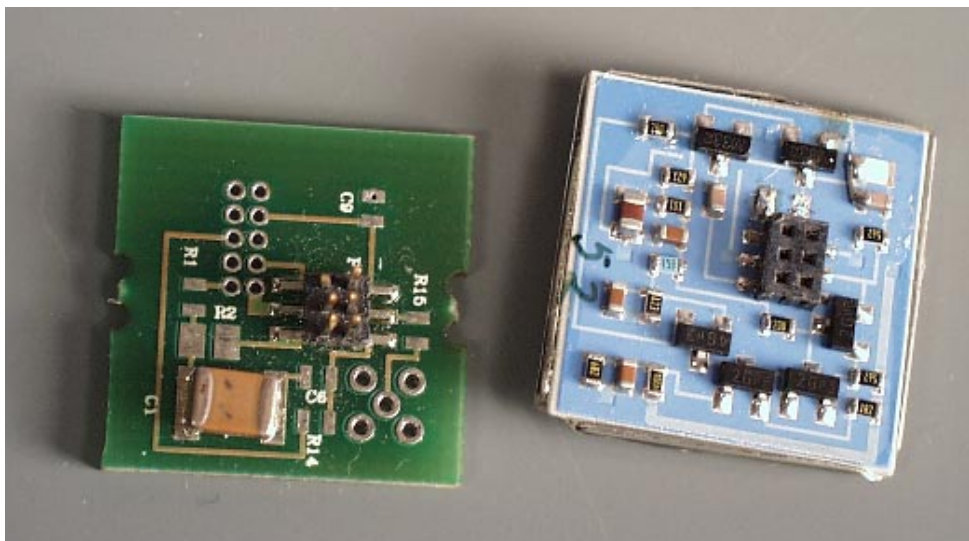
Mechanical layout of the AE-9020 photodiode and the charge preamplifier assembly.
